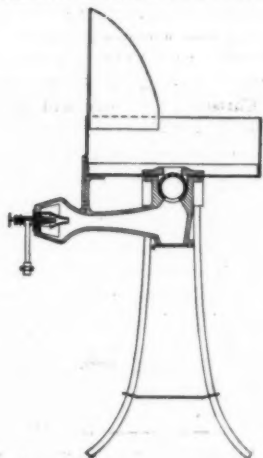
"BUFFALO" COMPRESSED-AIR FORGES.
